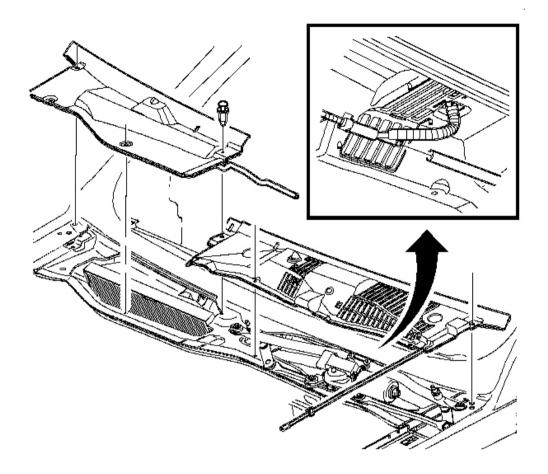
Removing/Installing Air Inlet Grille Panel Courtesy of GENERAL MOTORS CORP.
